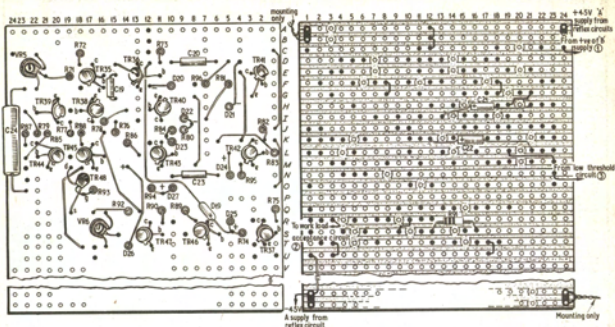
Component layout and wiring for the new board: (a) component side, (b) copper side showing breaks in the copper strips
